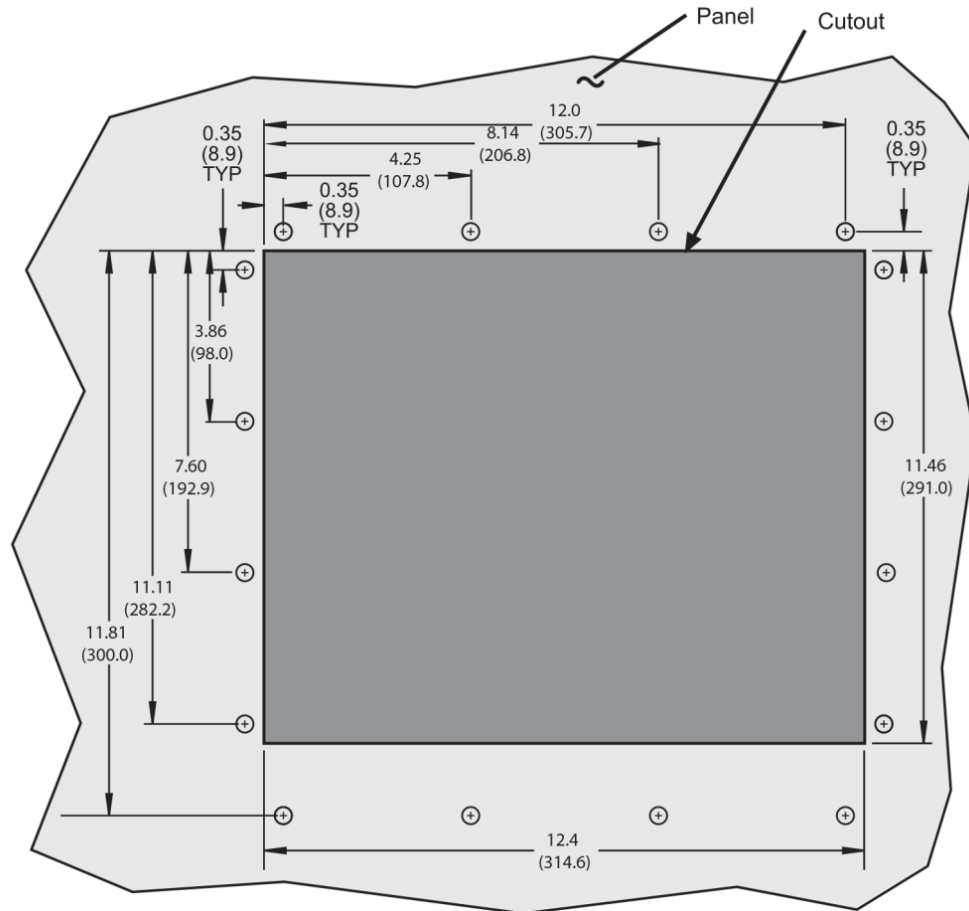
SmartPAC PRO Panel Mount Cutout Dimension
